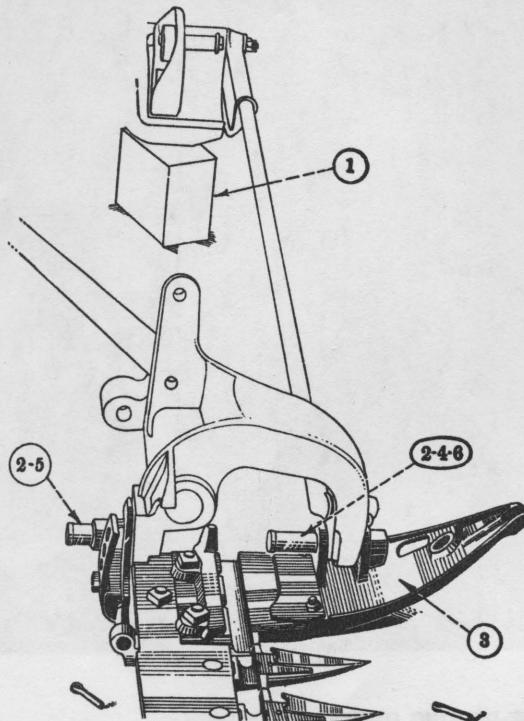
Illustration No. 2—Attaching cutter bar (inner shoe and hinge pins).
